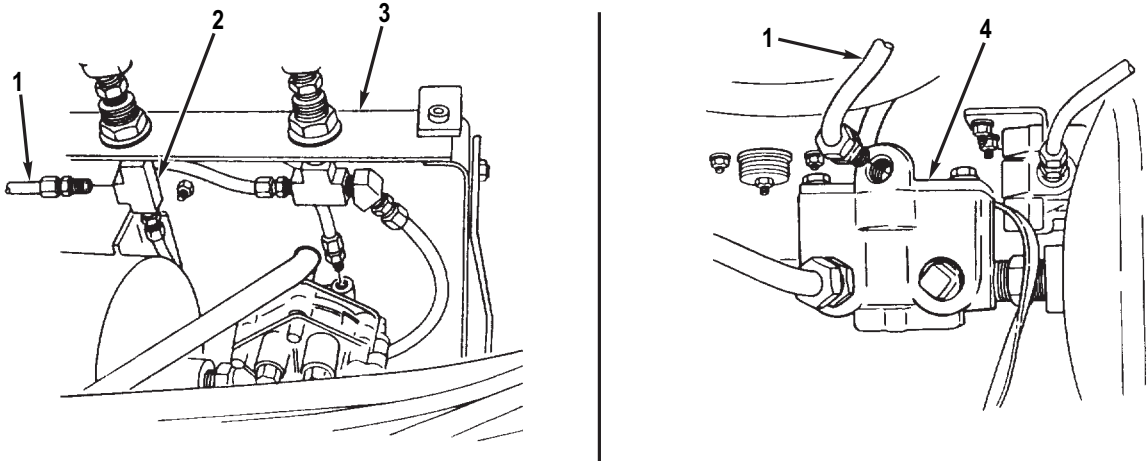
Airbrake Valve-to-Parking Brake Valve Tube Assembly Replacement.
